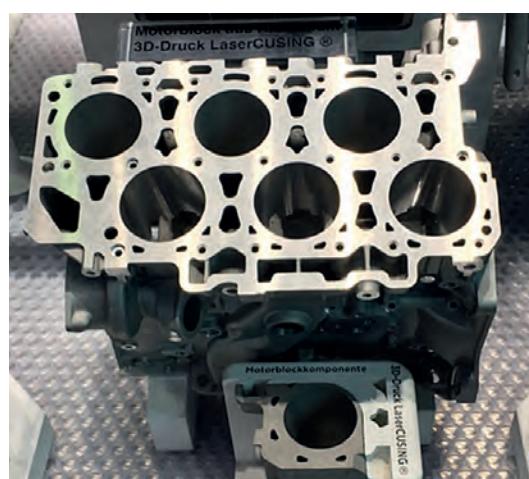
Engine block in aluminium for a VW. 3D printed at Robert Hoffmann GmbH. (Foto Sten Farre)
